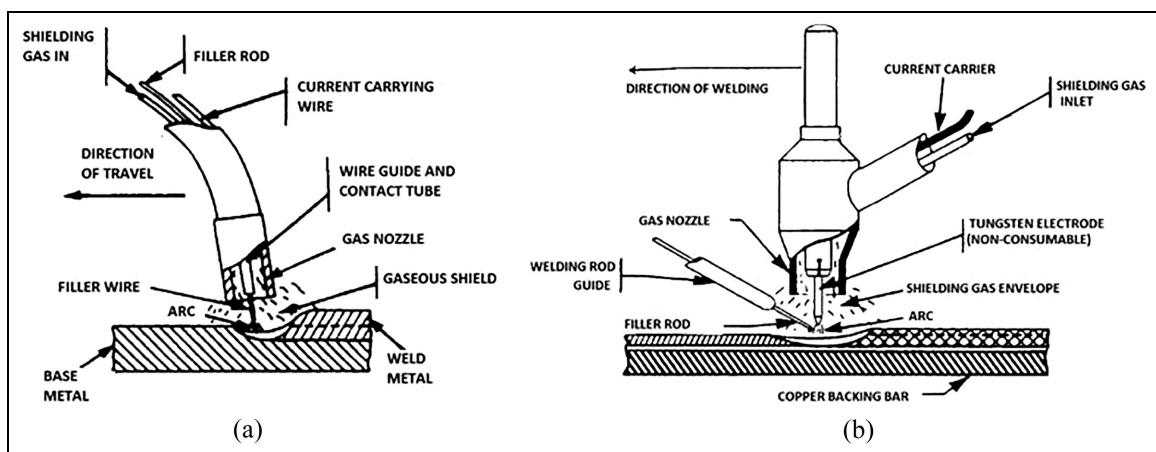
(a) Gas metal arc welding and (b) gas tungsten arc welding.
